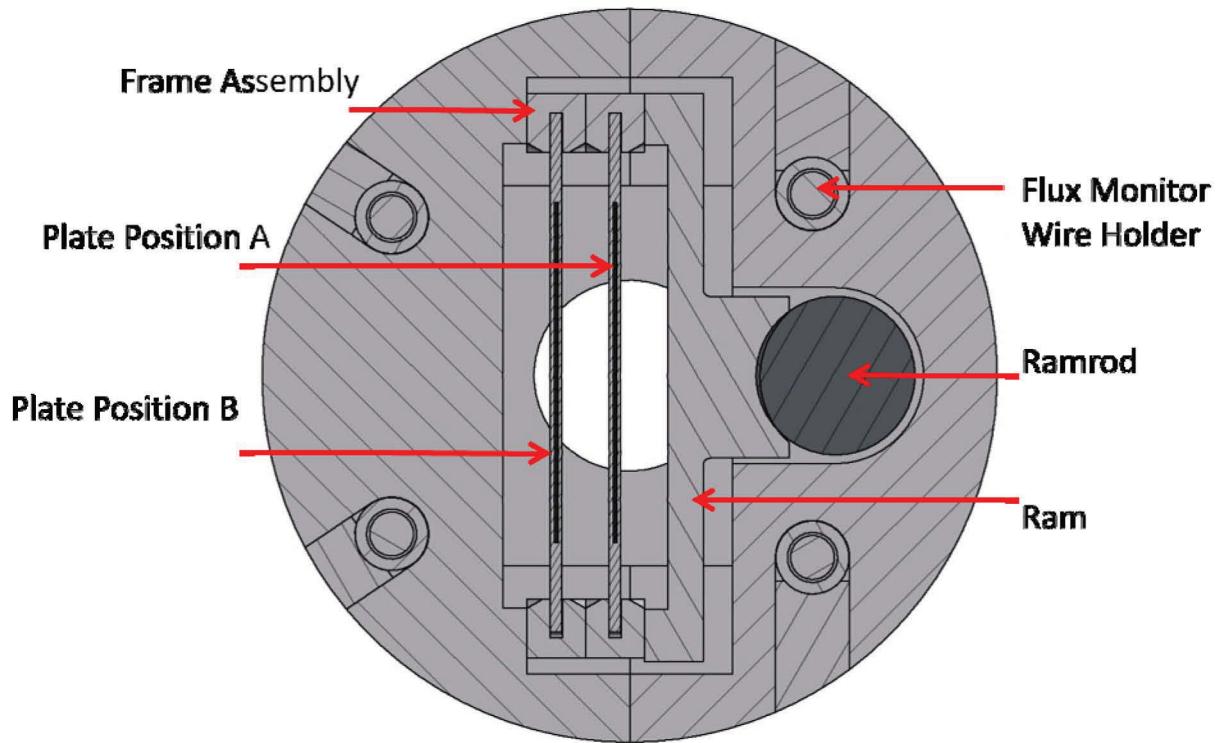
Radial Cross Section of the AFIP Test Train Assembly.
